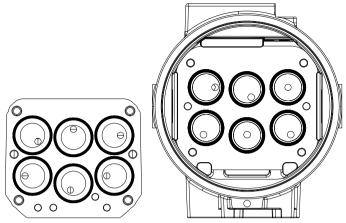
O-rings on the adapter and in the enclosure of 6DR5..5. (No O-rings in the enclosure of 6DR5..6)
